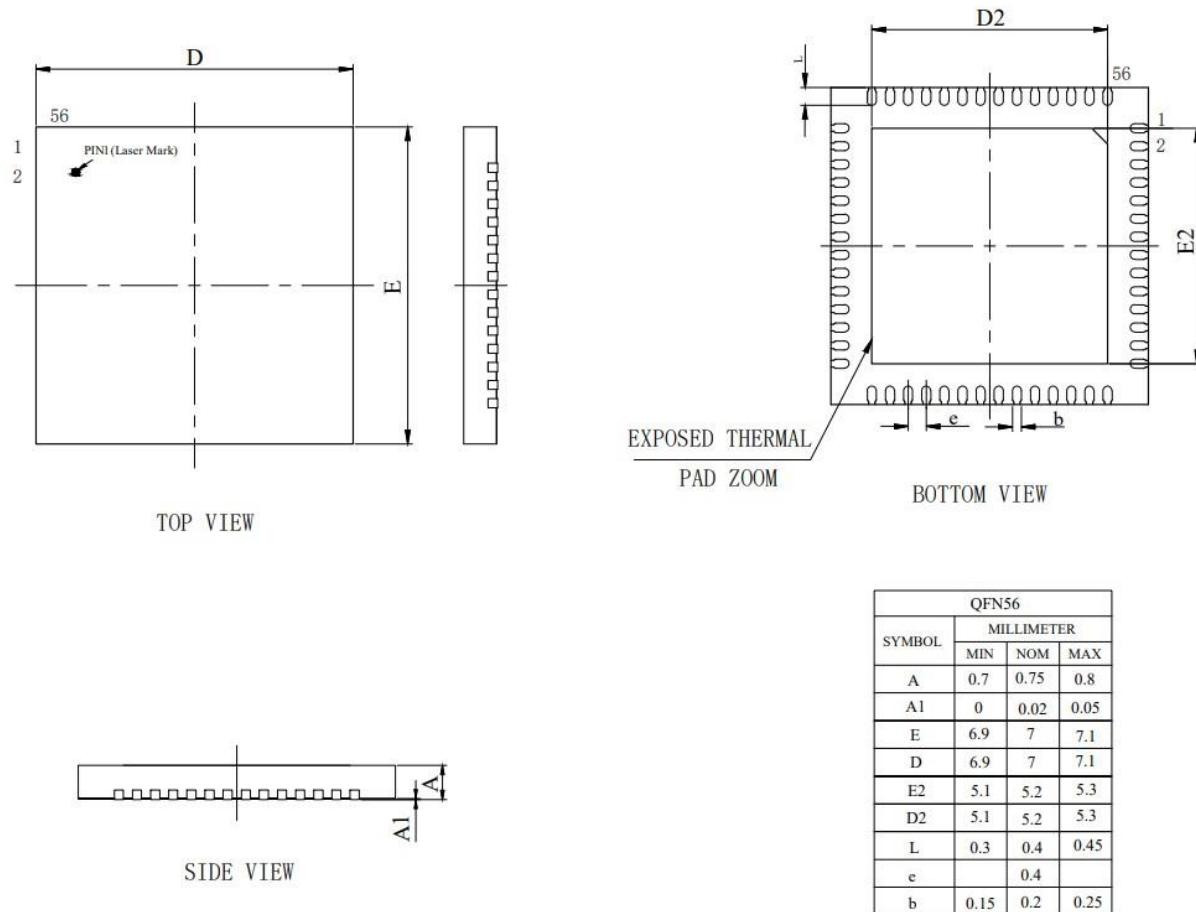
QFN56_7X7 Package Drawings and Dimensions
